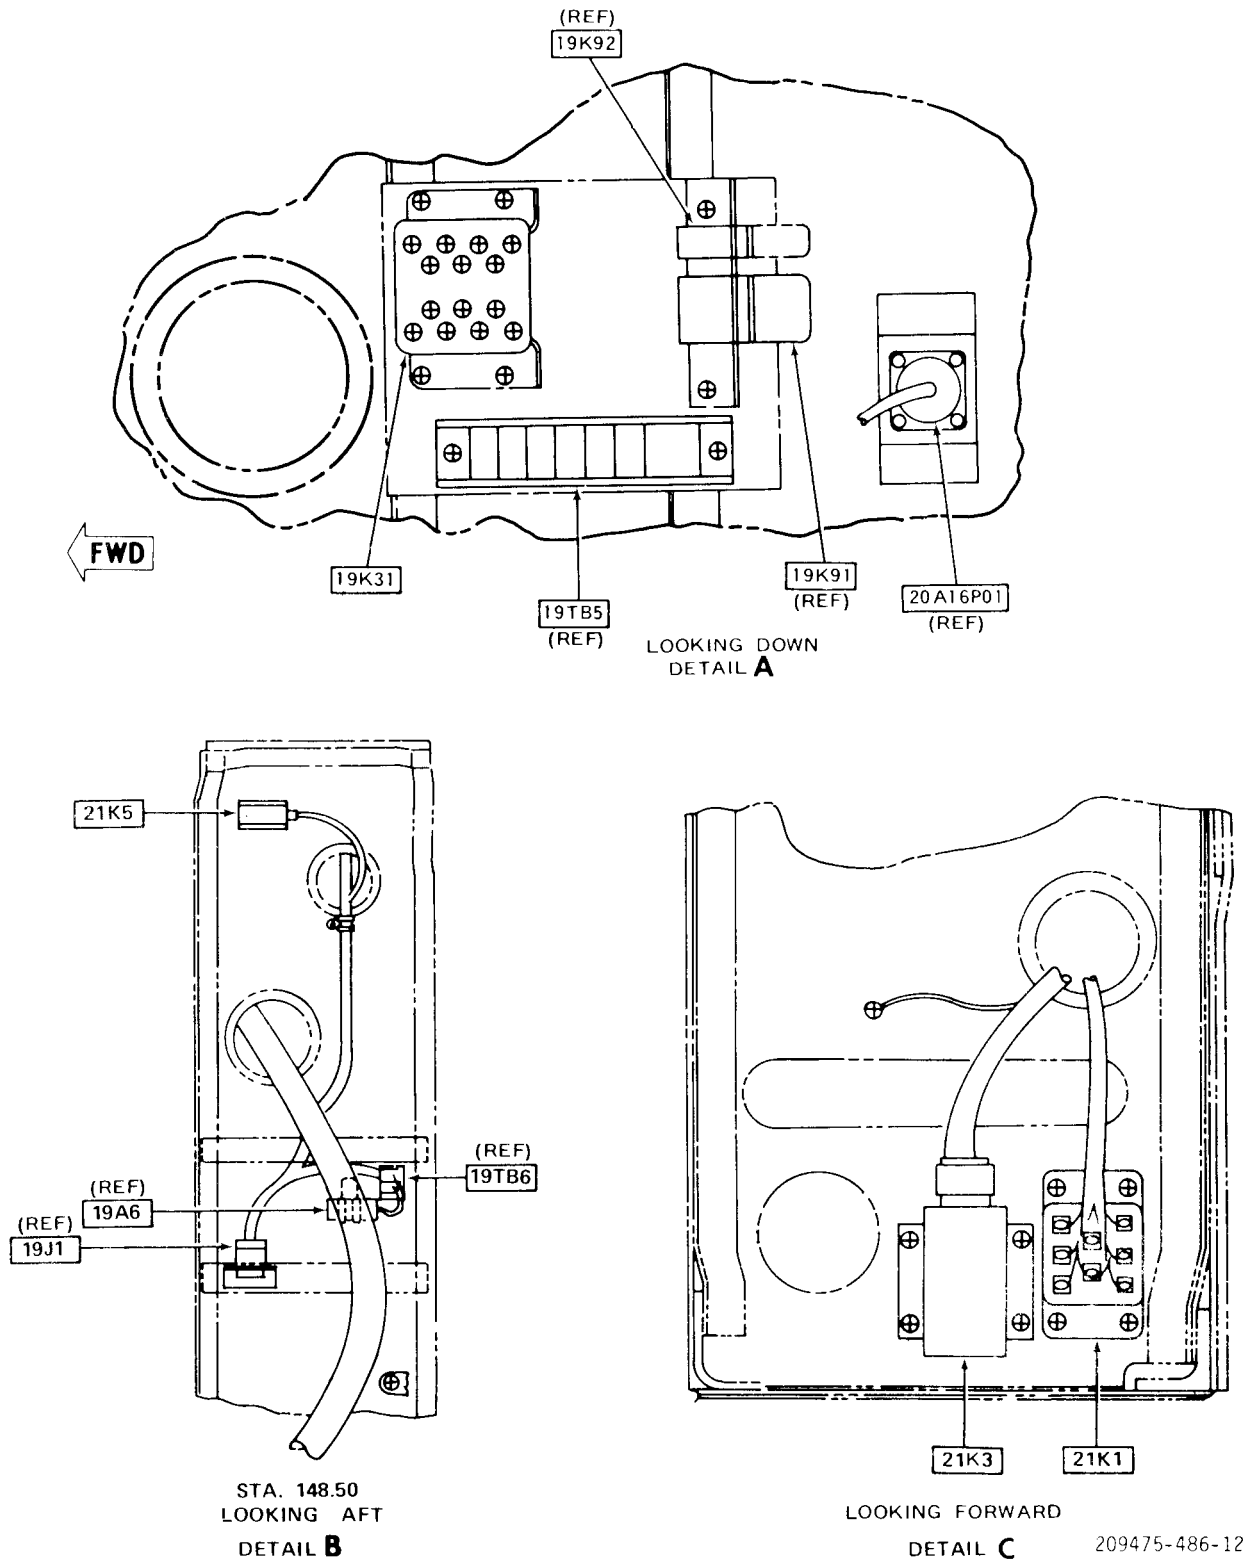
M Wing Stores Armament Subsystem (Equipment Location) (Sheet 12 of 12)
